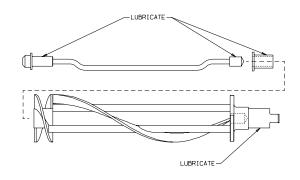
Lubricate bearing areas of breaker bar and bushing
